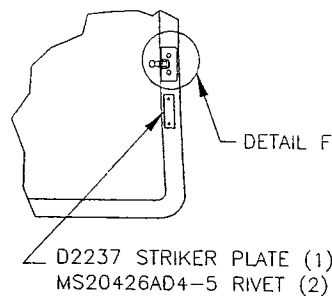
TYPICAL DOOR FRAME (AFT EDGE)
